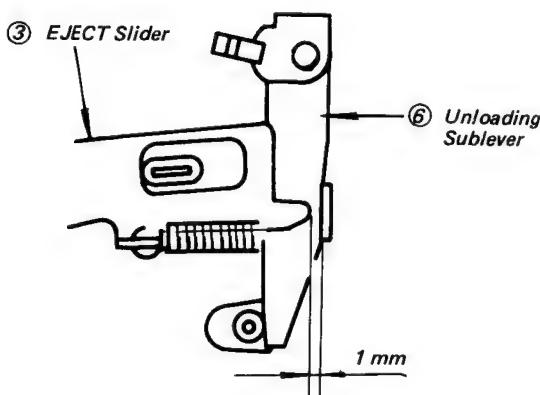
Clearance Between Eject Slide and Unloading Sublever
